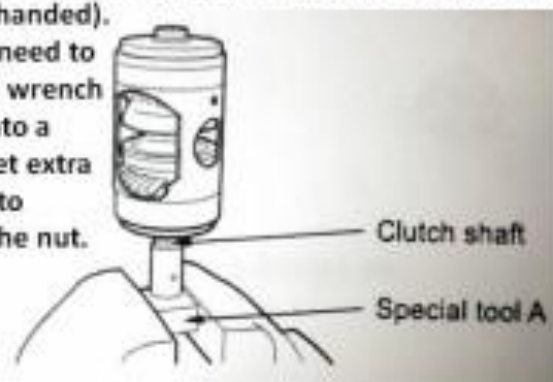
Step 5 Disassembling The Drive Cone Assembly, Con't.
